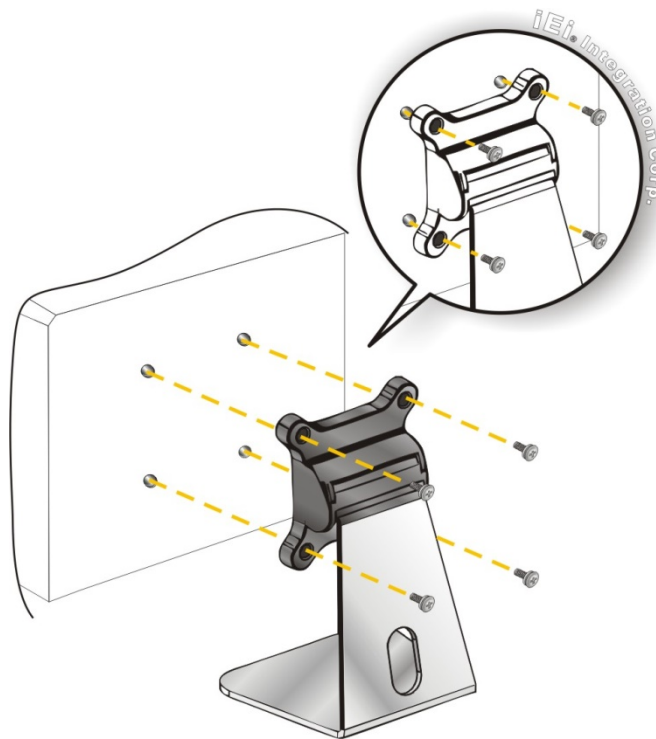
Stand Mounting (Stand-A/Bxx)
